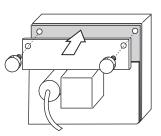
Replacing the Filter Wheel Assembly Cover
